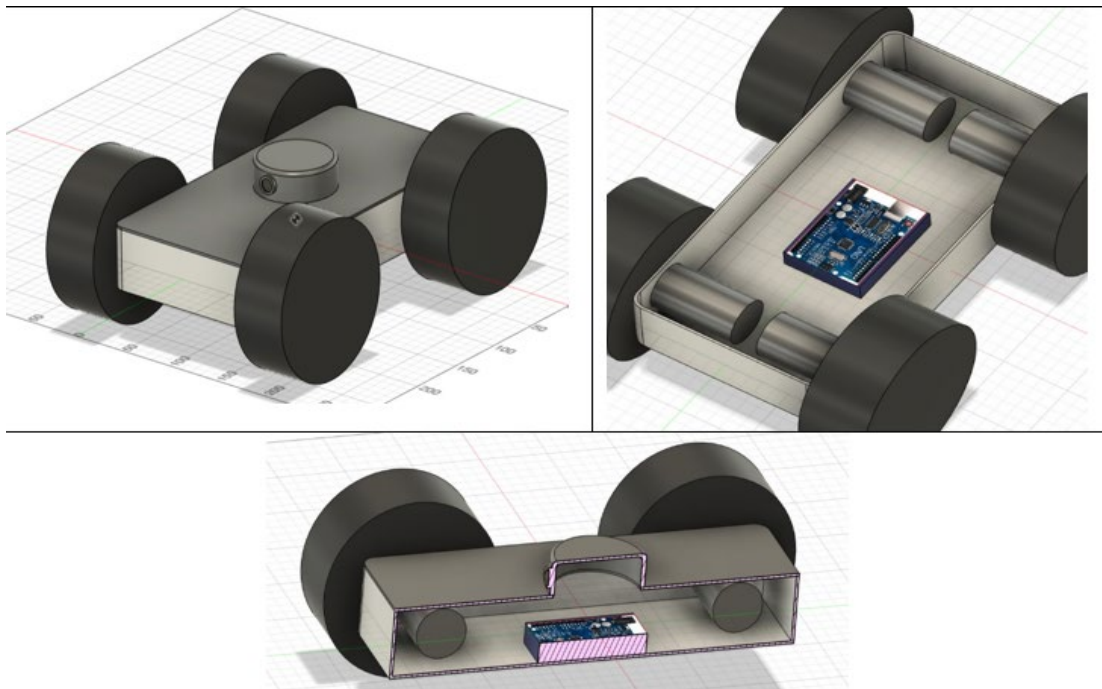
Structural Design of the Mobile Robot Showing the Placement of the Electric Motor, Gearbox, and Control Unit within the Chassis
